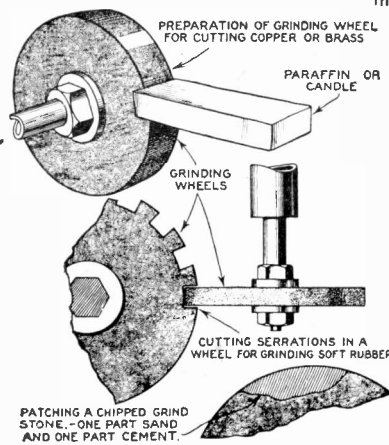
Hold a paraffin candle against your grinding wheel, as it revolves, to prevent its filling with metal and glazing. How to repair a grindstone, and prepare emery wheels for grinding india rubber.
